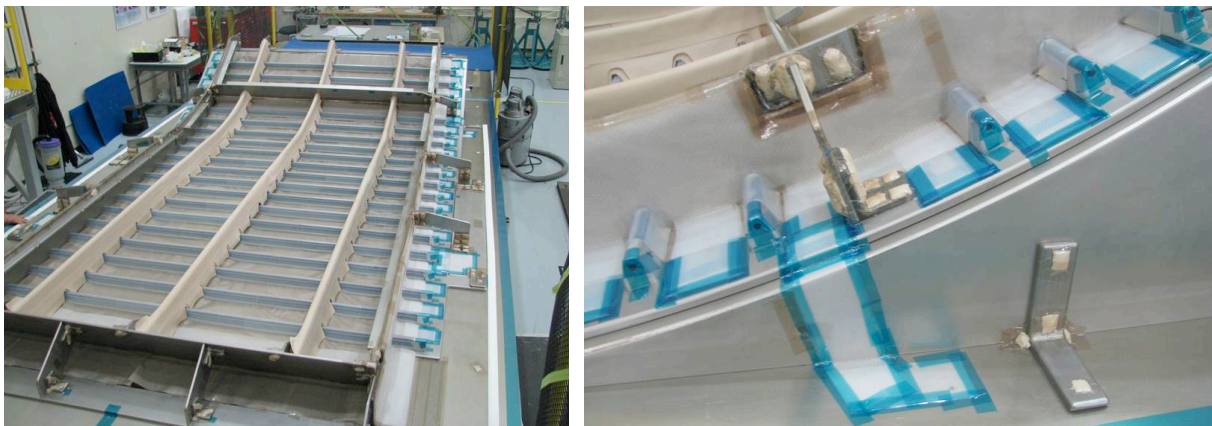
IML Tool Details Cleaned and Ready for Assembly onto Cure Tool
